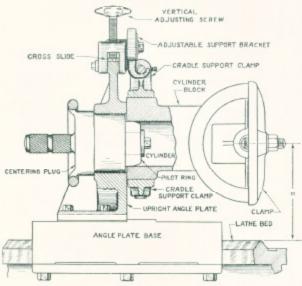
C—How Cylinder is Centered Concentric to Lathe Spindle.
